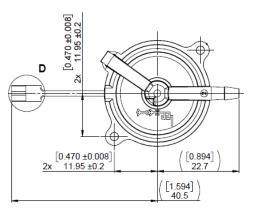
HP Series Mounting Geometry. Dimensions in mm [inches]
